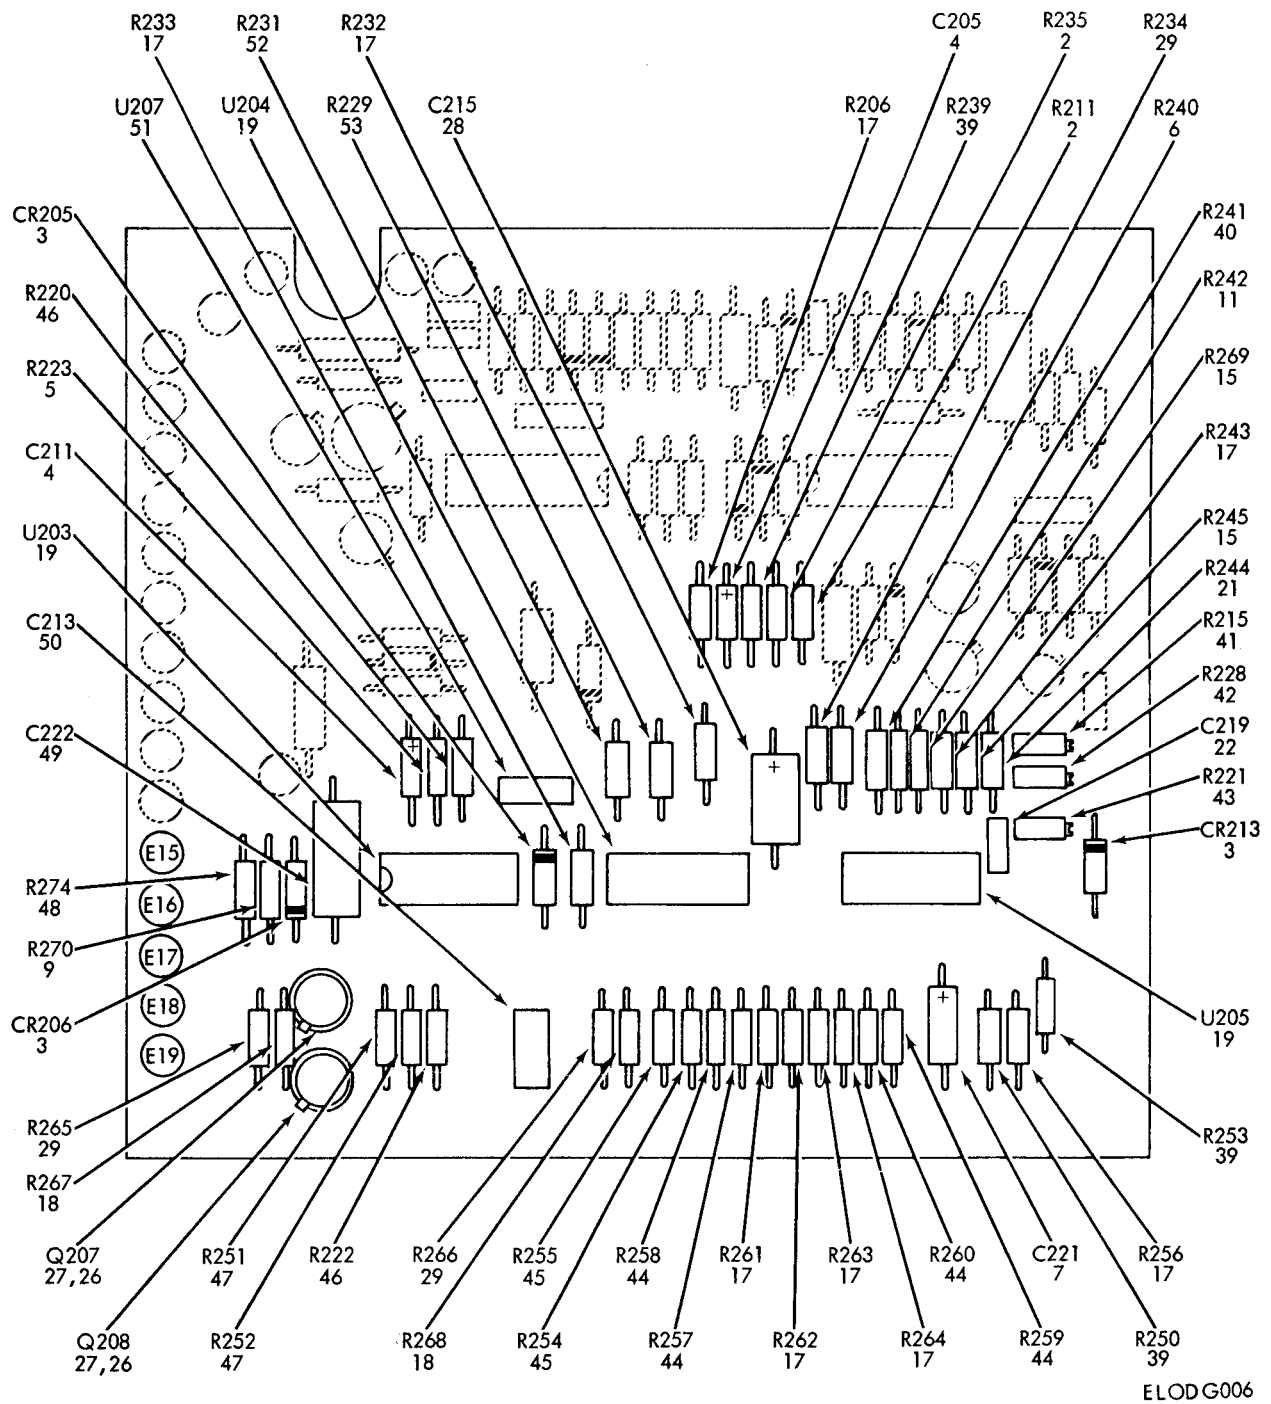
© Printed circuit board assembly 0A (sheet 2 of 2).
